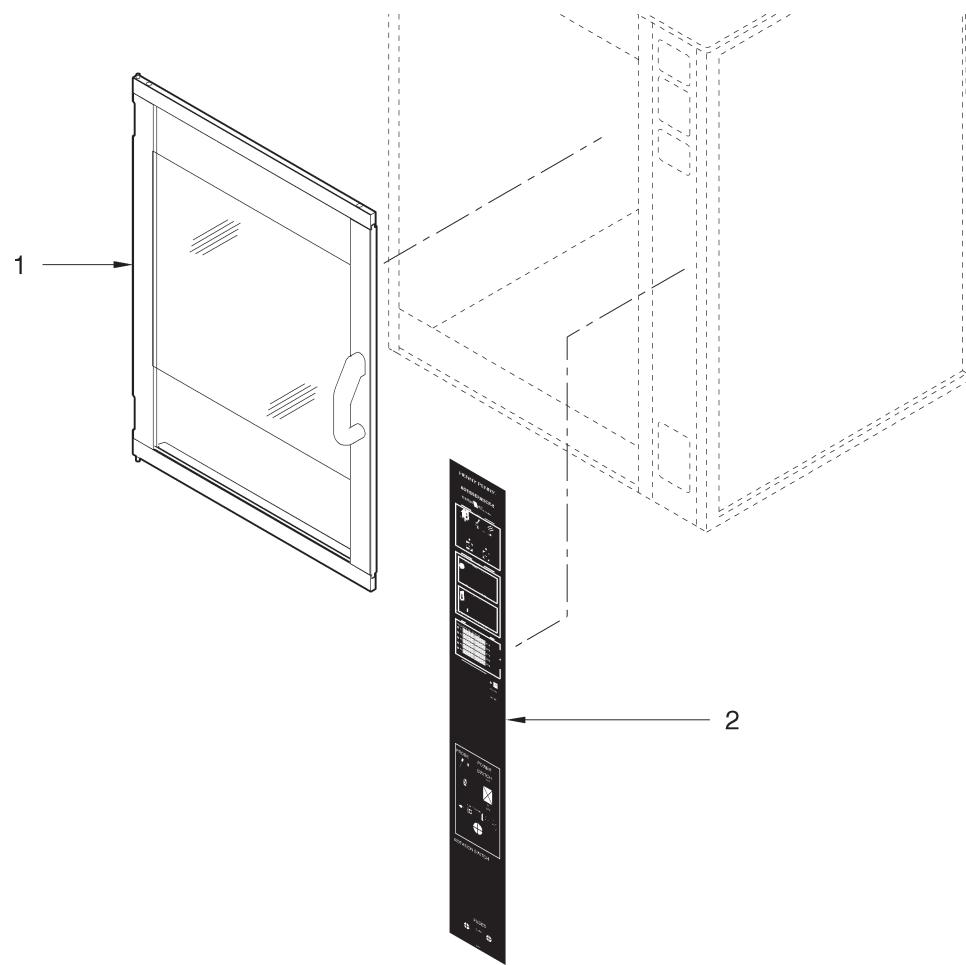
SCR-8 Short and Tall Units Special Parts
